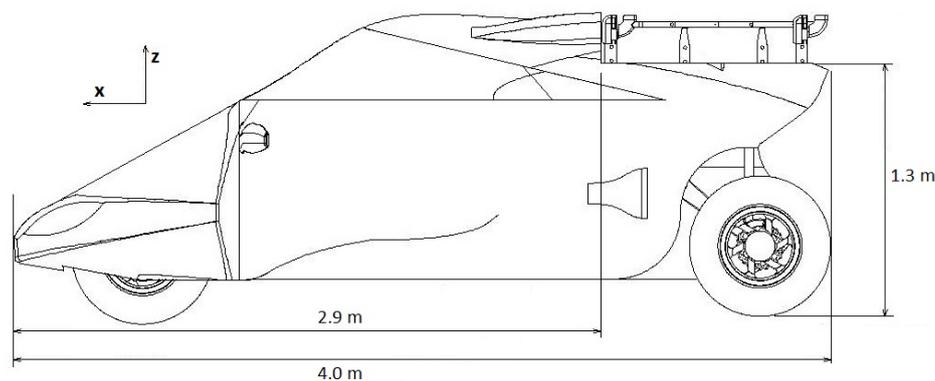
Side view of the attachment system with respect to the car dimensions
